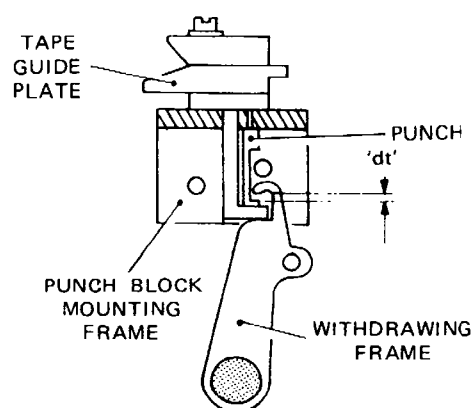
PUNCH BLOCK (LEFT-HAND VIEW)
